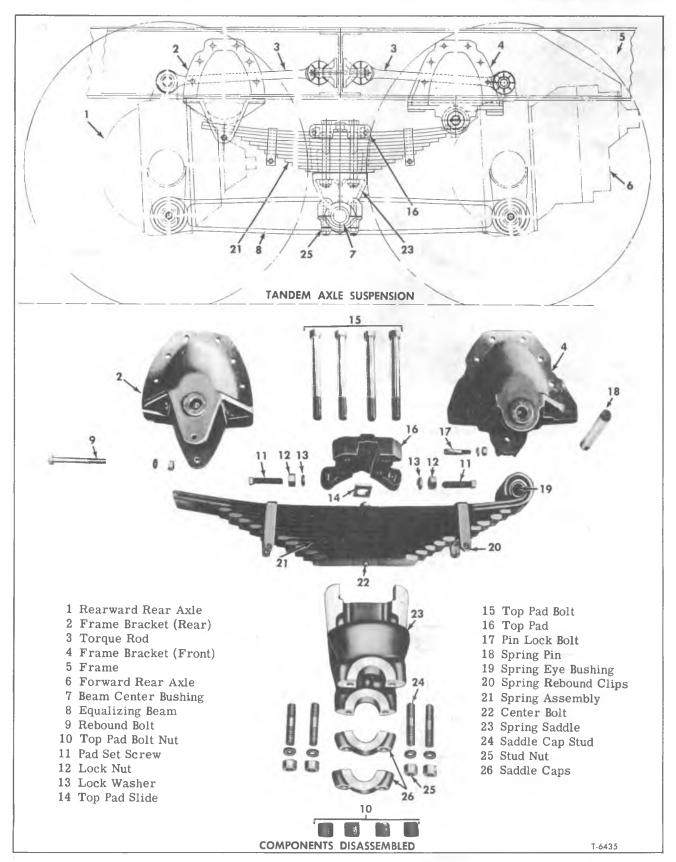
Tandem Rear Axle Suspension (Hendrickson R.T.) (Typical)
